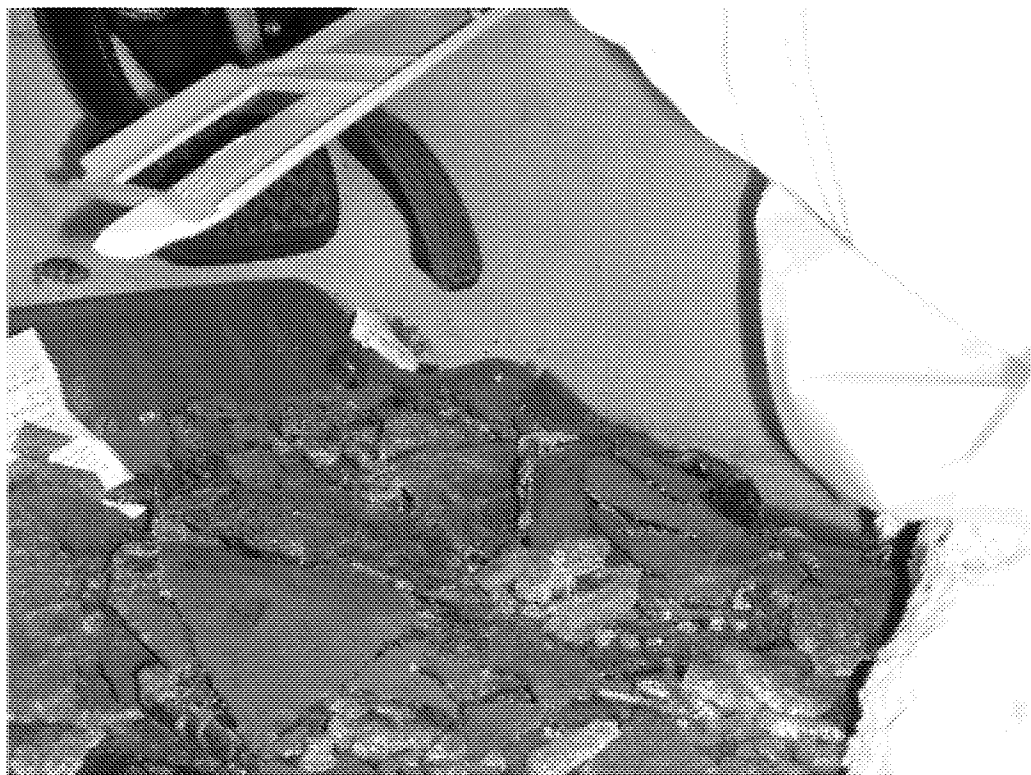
LHF disc brake pad, friction surface/rotor side
